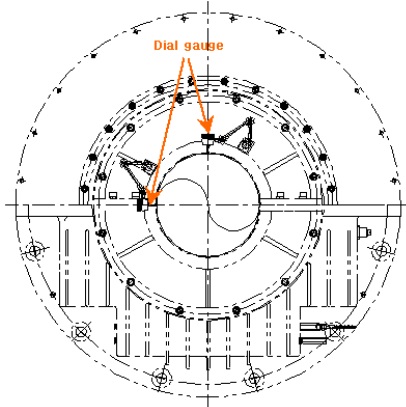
Schematic of displacement measurement for Bearings with oil-lift system
